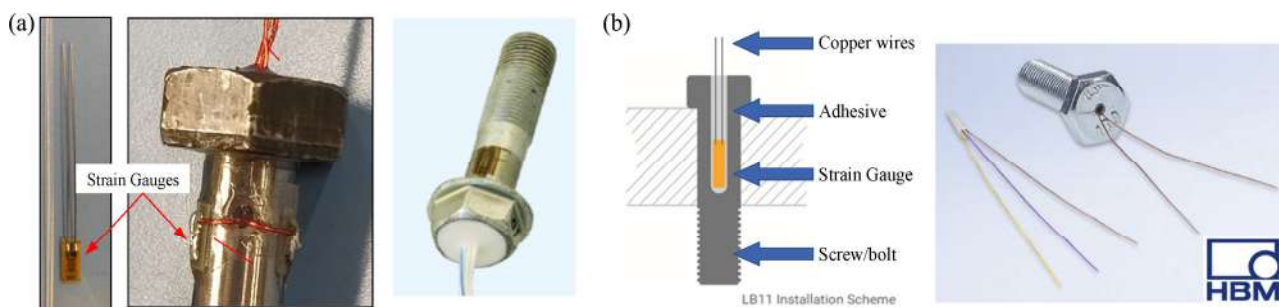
Measurement techniques using the strain gauges, (a) outside the bolt, (b) inserted into the bolt.
